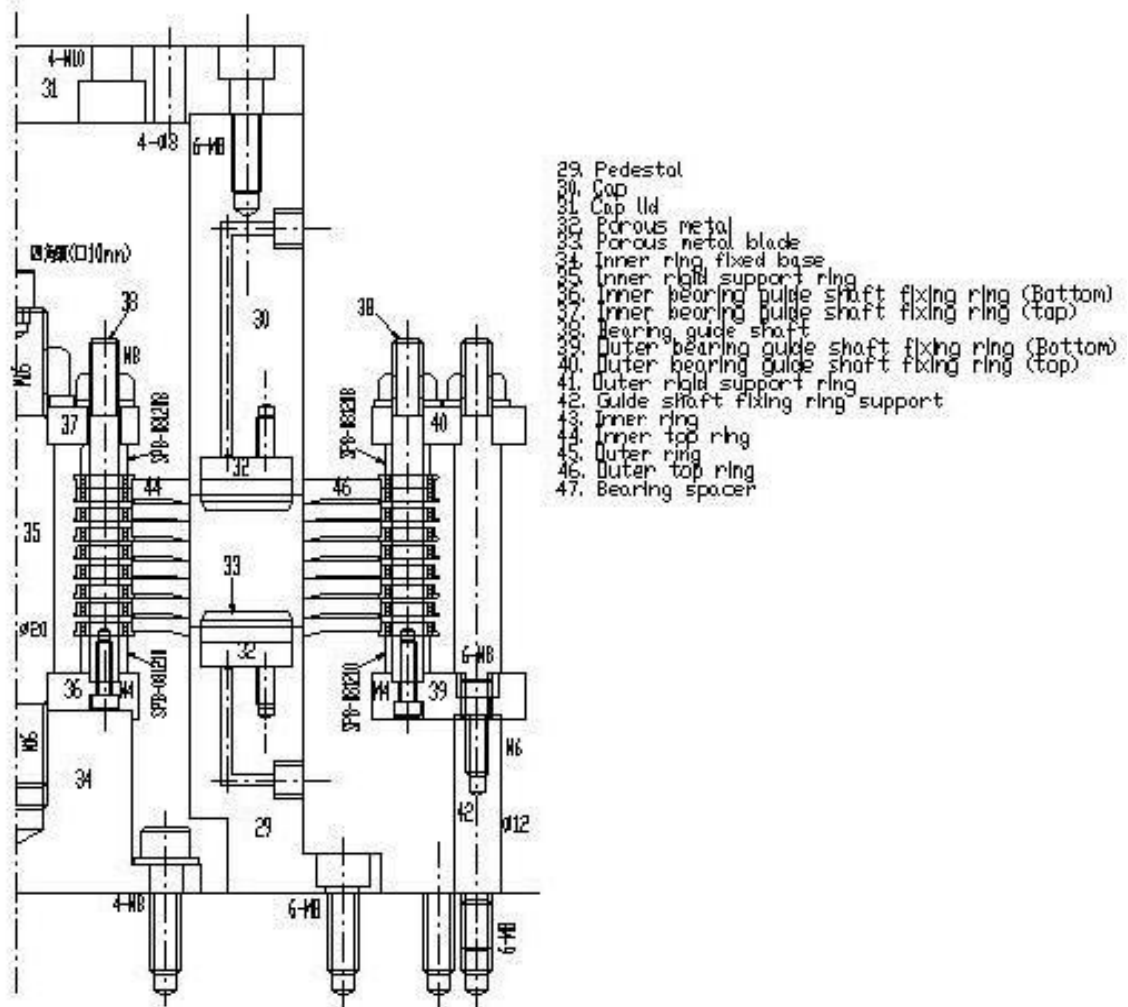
Schematic figure of 8 stacked-ring shear type
